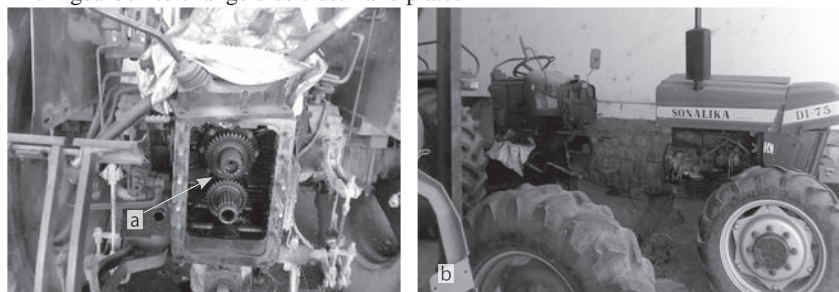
Illustration of gear box breakdown: a) Broken gears, b) Separation of engine from gearbox to change disc clutch and plates
